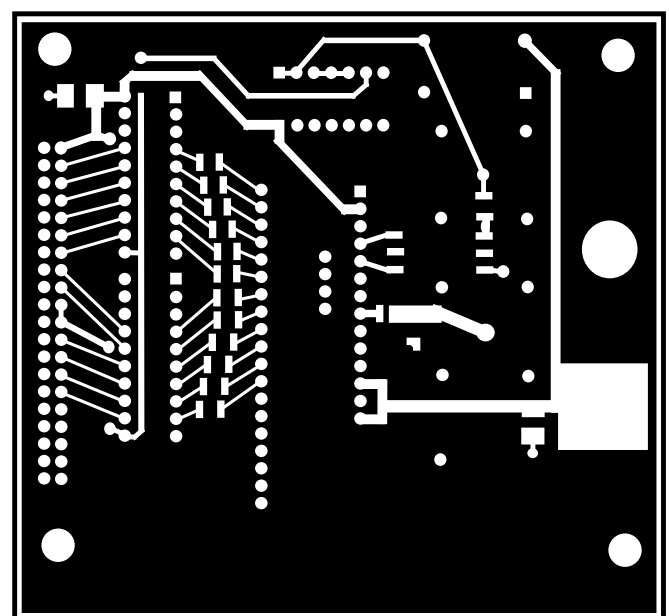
AD9042D/PCB Bottom Side Copper (Negative)
